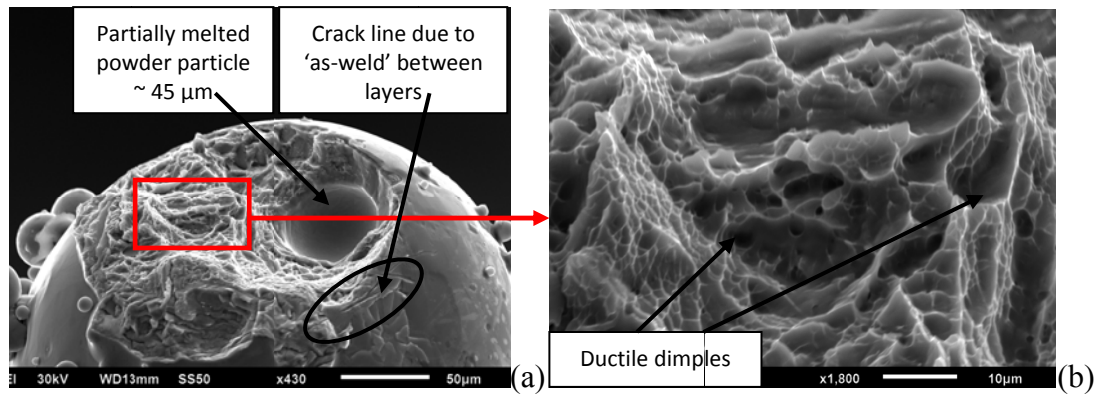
Fracture surface of as-received, 35° build angle strut of SLM Ti-6Al-4V manufactured at 200 W laser power and 1000 μ s laser exposure time; (a) at lower magnification; (b) at higher magnification which shows ductile dimples [S1-35-200-1000-AR]
